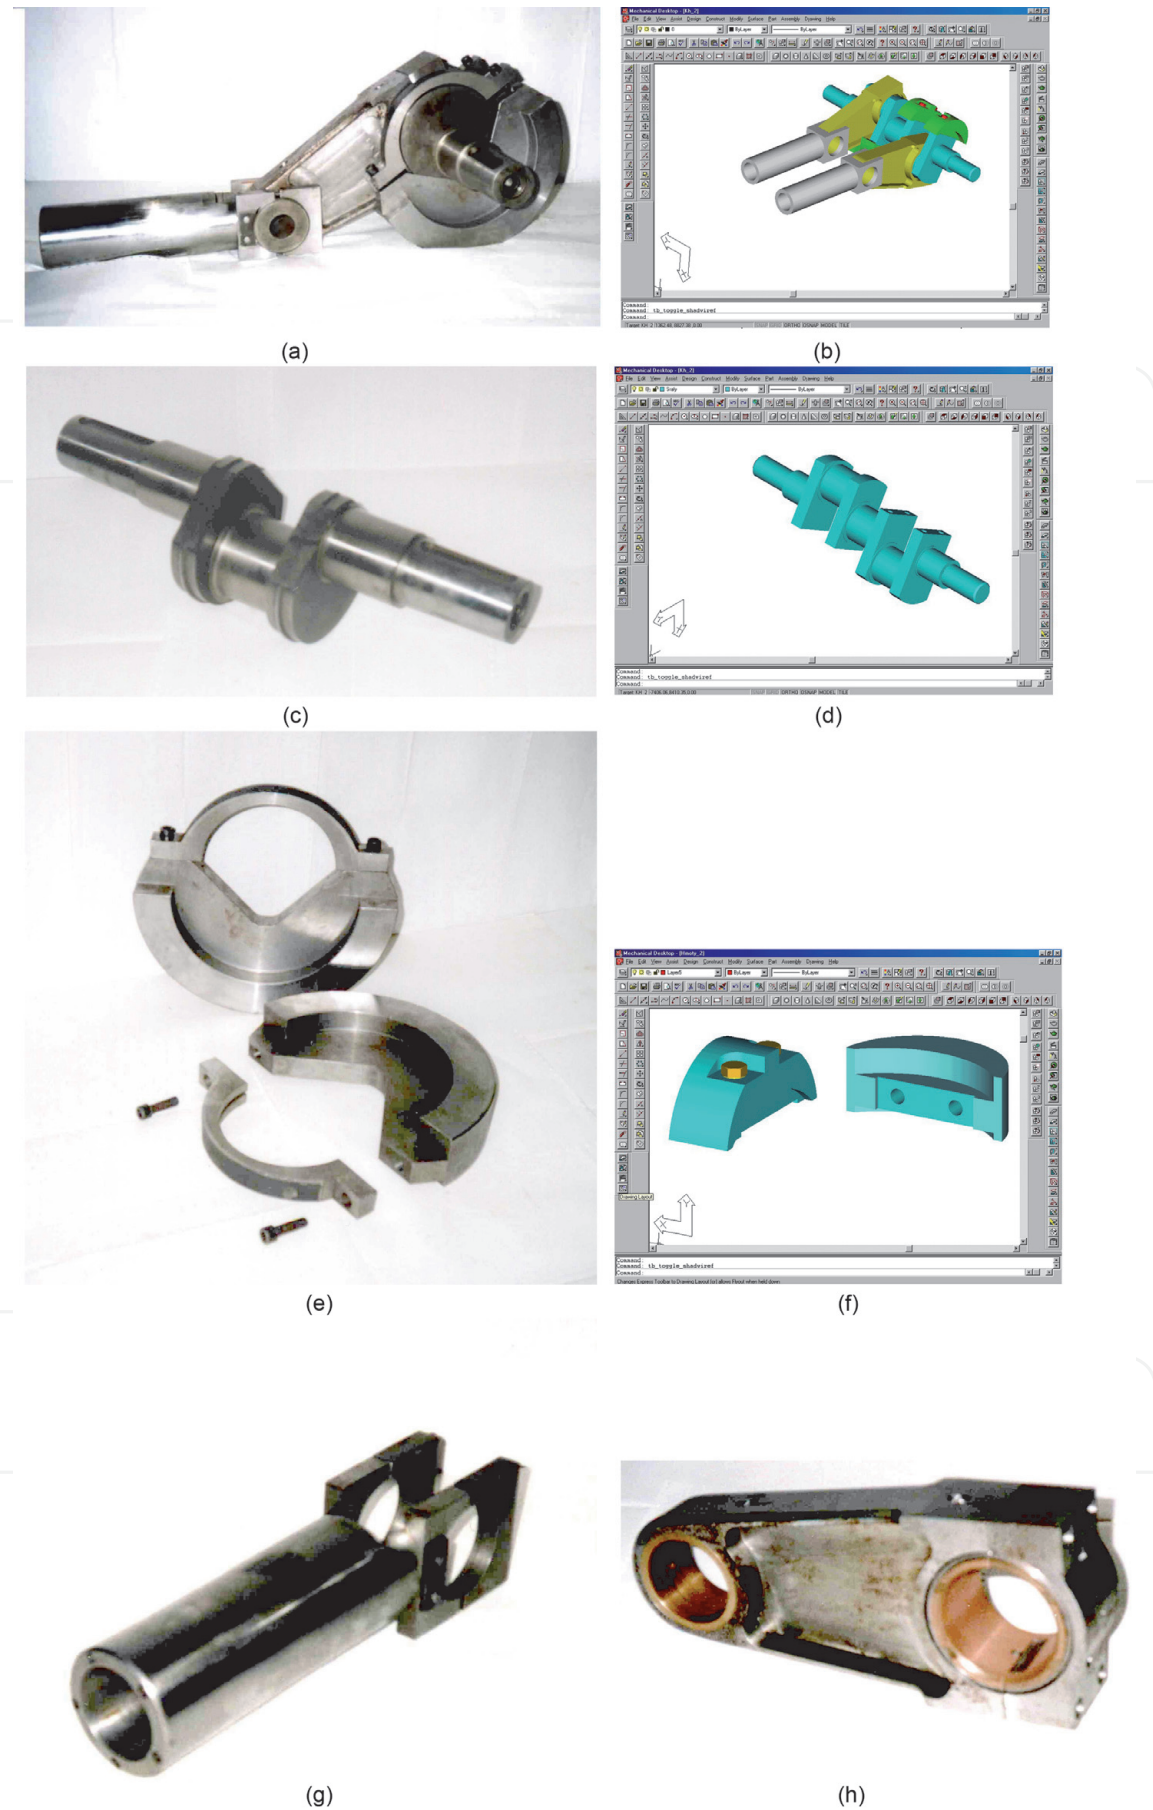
Selection of parts for modular conception of a press. (a) Crank gear of single-chamber briquetting press BZ 50–250, (b) crank gear of dual-chamber briquetting press 2BZ 50–500. (c) Crank shaft of single-chamber briquetting press BZ 50–250, (d) crank shaft of dual-chamber briquetting press 2BZ 50–500, (e) counterweight of single-chamber briquetting press BZ 50–250, (f) counterweight of dual-chamber briquetting press 2BZ 50–500, (g) crusader – usable in both versions and (h) connecting rod.
